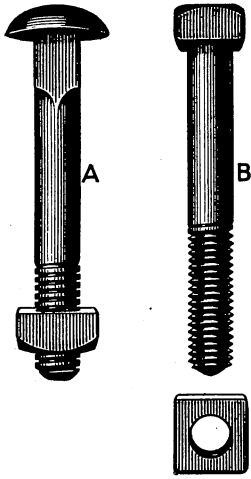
Bolts: A, carriage bolt; B, machine bolt.
